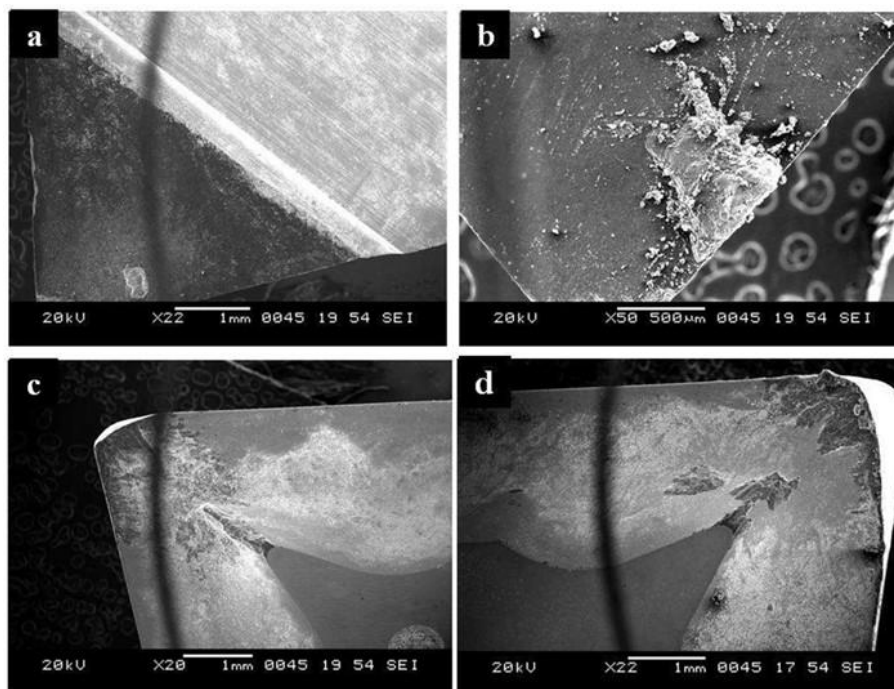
SEM Photographs of cutting inserts pertaining to a) PCD insert on machining SiCp reinforced Al-Si alloys b) PCD insert on machining Al₂O₃P reinforced Al-Si alloys c) K10 insert on machining SiCp reinforced Al-Si alloys d) K10 insert on machining Al₂O₃P reinforced Al-Si alloys
